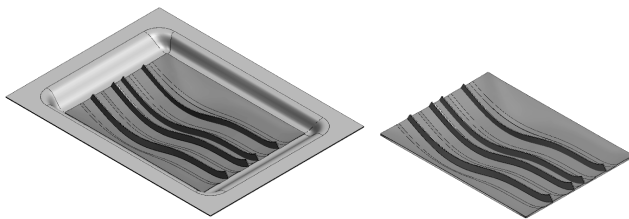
Deep-Drawn Part before (left) and after (right) cut-out
